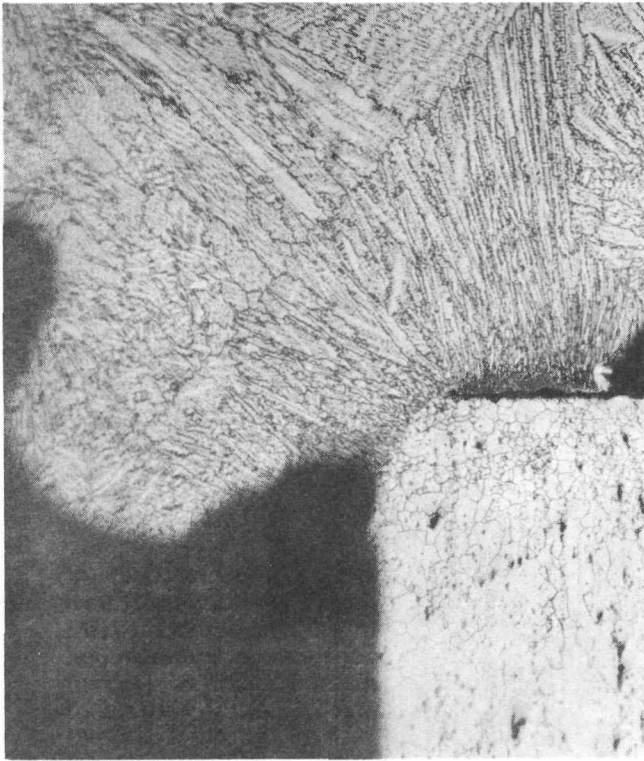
EB WELD BEAD SHOWING 0.008 INCH FUSION IN SPECIMEN 2; MAGN 64X
